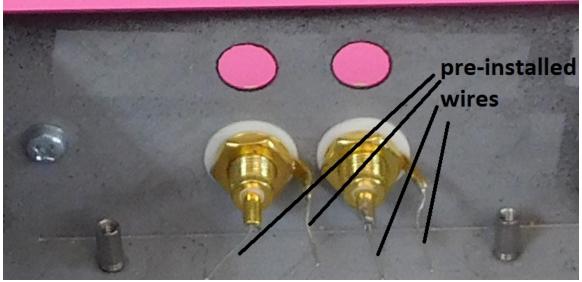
install the RCA input jacks with the wires you installed in the previous step If the insulating washers and RCA jacks are installed correctly, there will be no connection between the grounds of the RCA jacks and chassis at this step of the assembly. Use an ohmmeter between the GREAT GND terminal and the ground lugs of the RCA jacks. It should show infinite ohms, indicating an open circuit.
